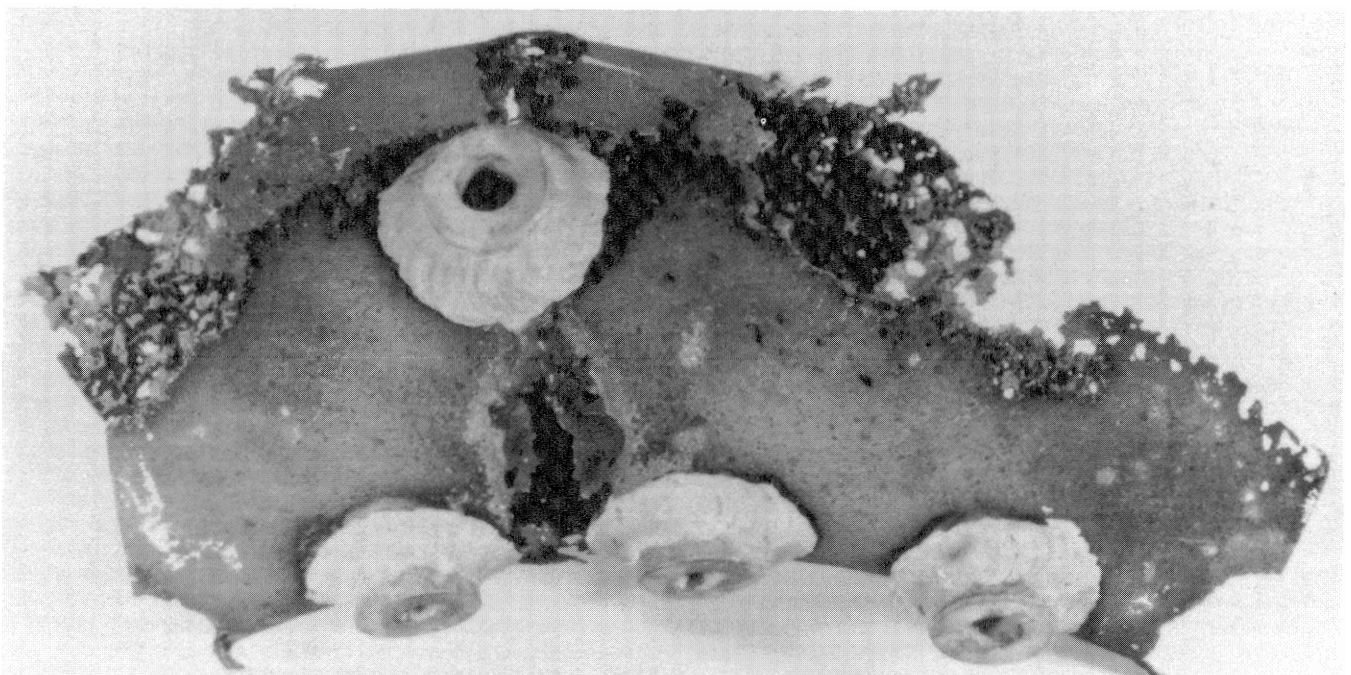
Severely Corroded Pipe Section Containing Four Uncorroded Welded Nozzles of a Corrosion-Resistant Alloy.
